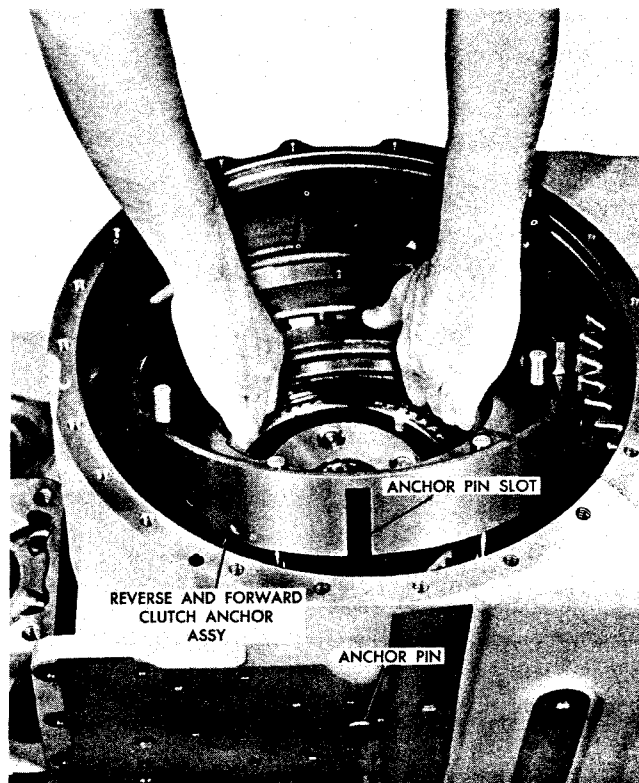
Removing (or installing) forward- and reverse-range clutch anchor assembly and anchor pin
